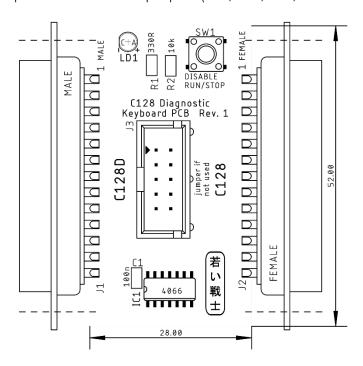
Dimensions of the C128 Diagnostic Keyboard PCB
